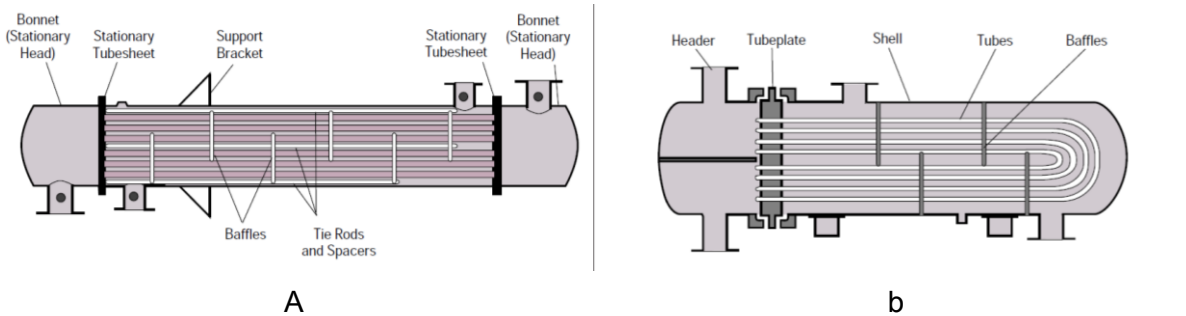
Shell and tube heat exchanger type. (a) Fixed-tubesheet heat exchanger (b) U-tube heat exchanger
